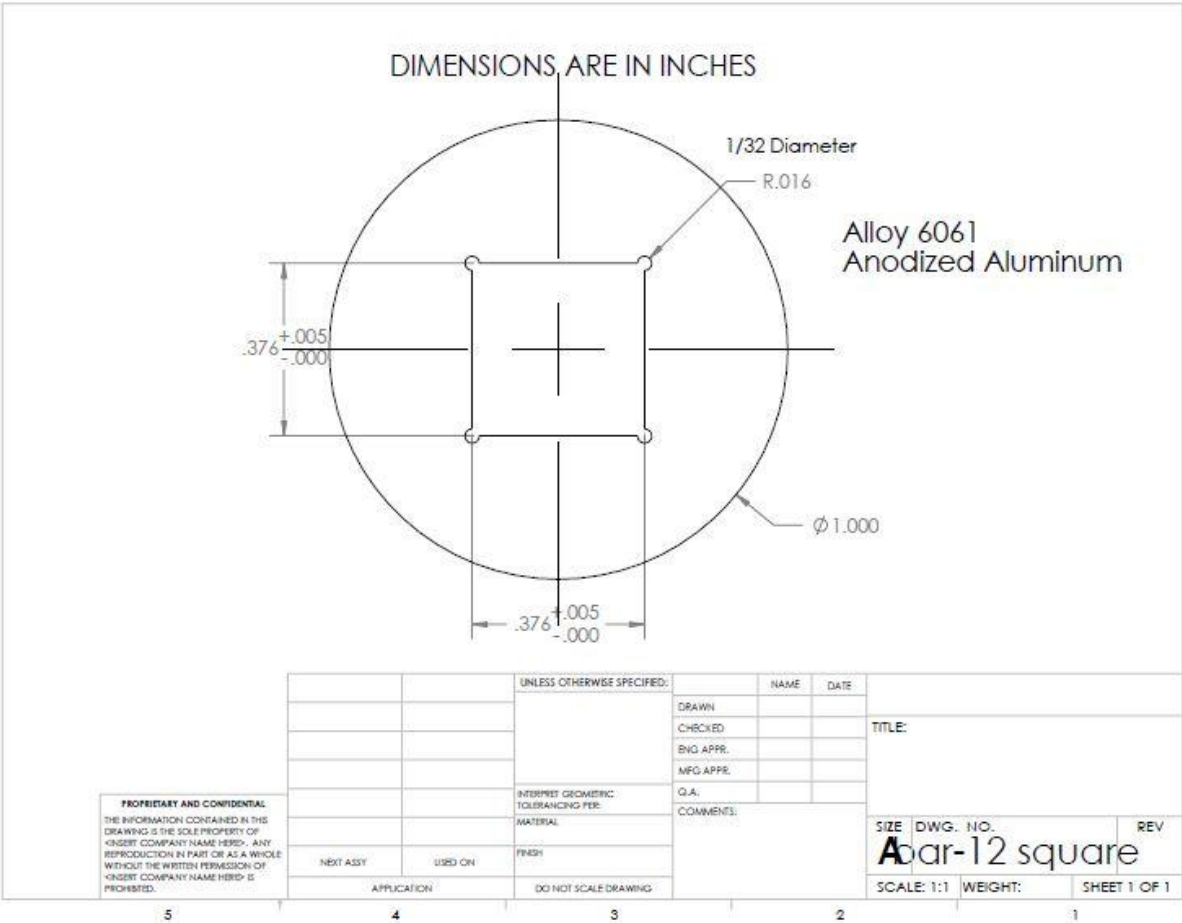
Square socket Dimensions for both bars (where torque wrench is attached)
